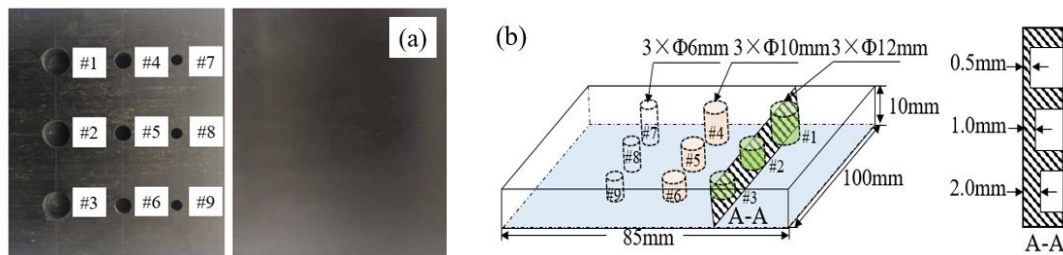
a)Optical photo of the #ES1 CFRP specimens and b) its geometric dimensions
